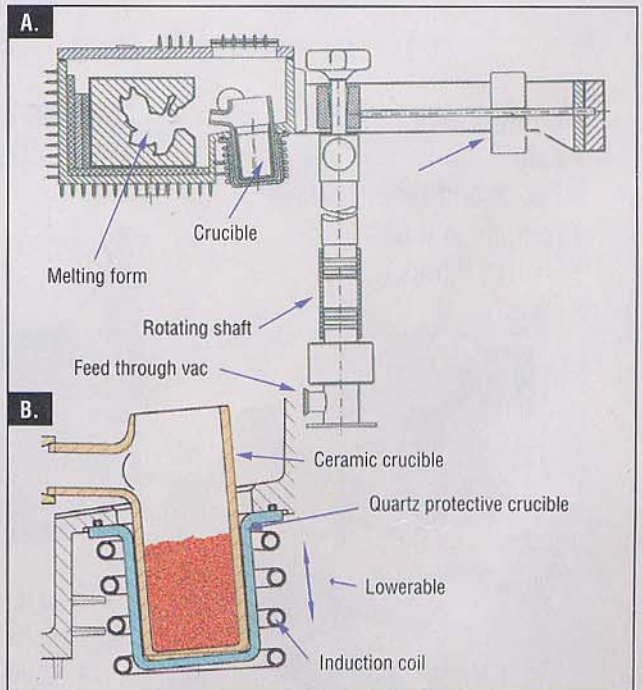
A. Casting arm with shaft and rotary transmission lead through, B. Melting crucible with induction coil
